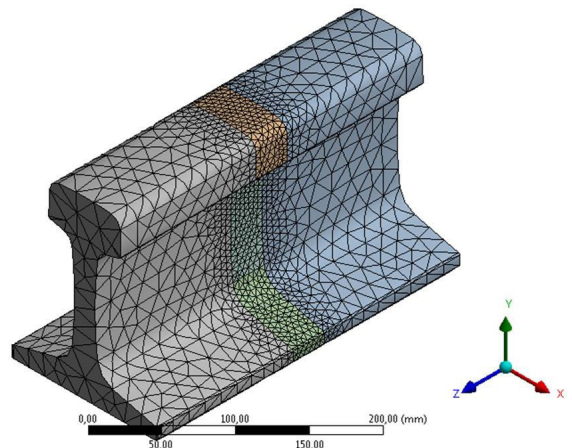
3D finite-element model for the welded rail joint.
